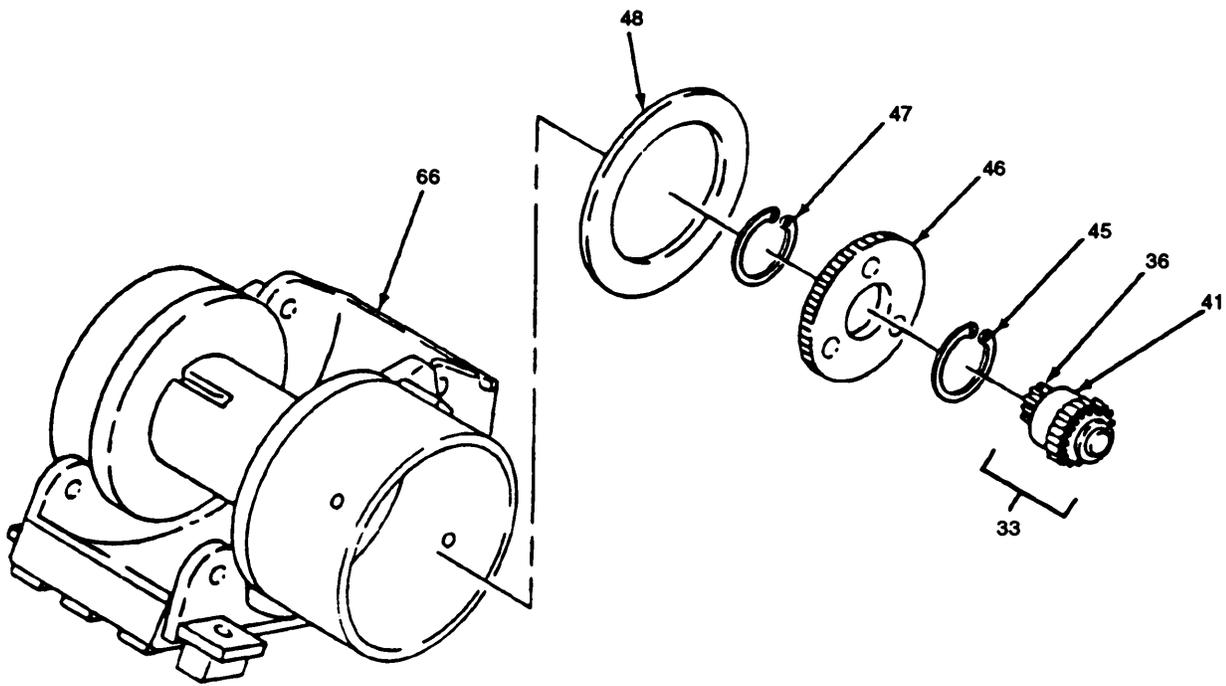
Winch Assembly Model 11-S-EC, Reassembly (Sheet 6 of 10).
